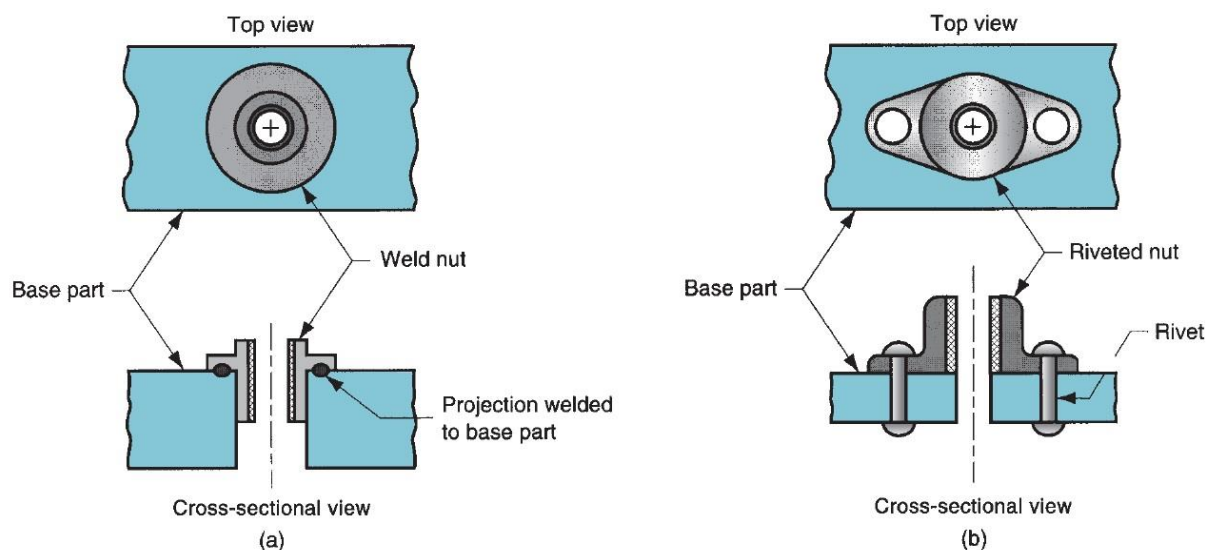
Captive threaded fasteners: (a) weld nut and (b) riveted nut.
